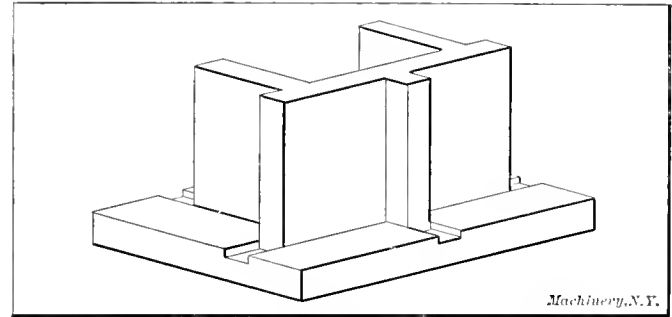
Another Objectionable Method of attaching Punch to Plate
